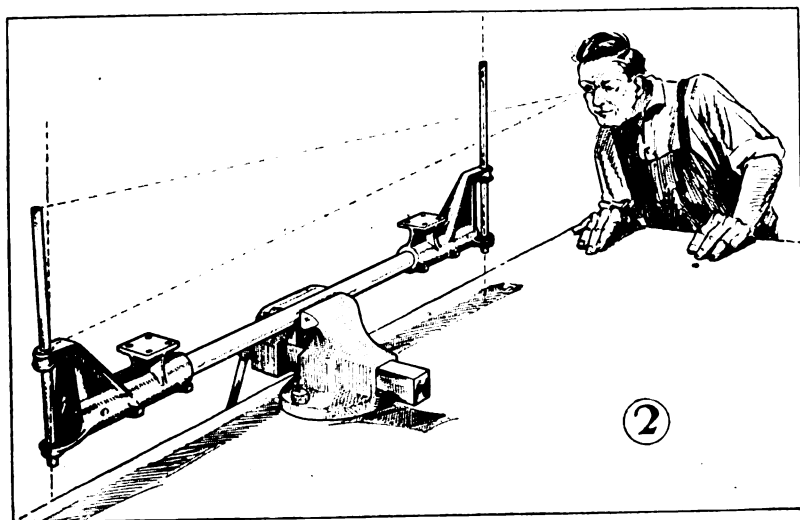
Testing the alignment of the axle by inserting rods in the spindle-bolt holes
